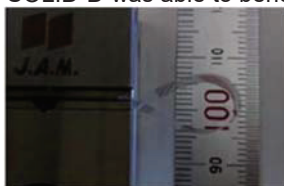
Bending test of ultra-thin glass cut by SOLID-D
